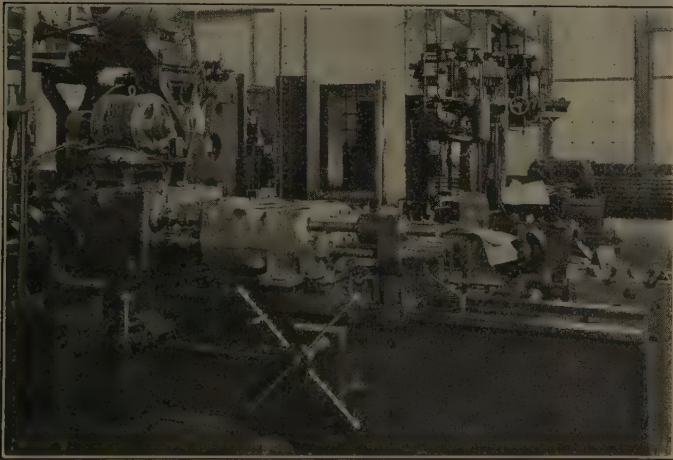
SPECIAL MACHINE FOR BORING AND FINISHING ALL SHAFT AND SPINDLE HOLES IN HEADSTOCK AT ONE SETTING
